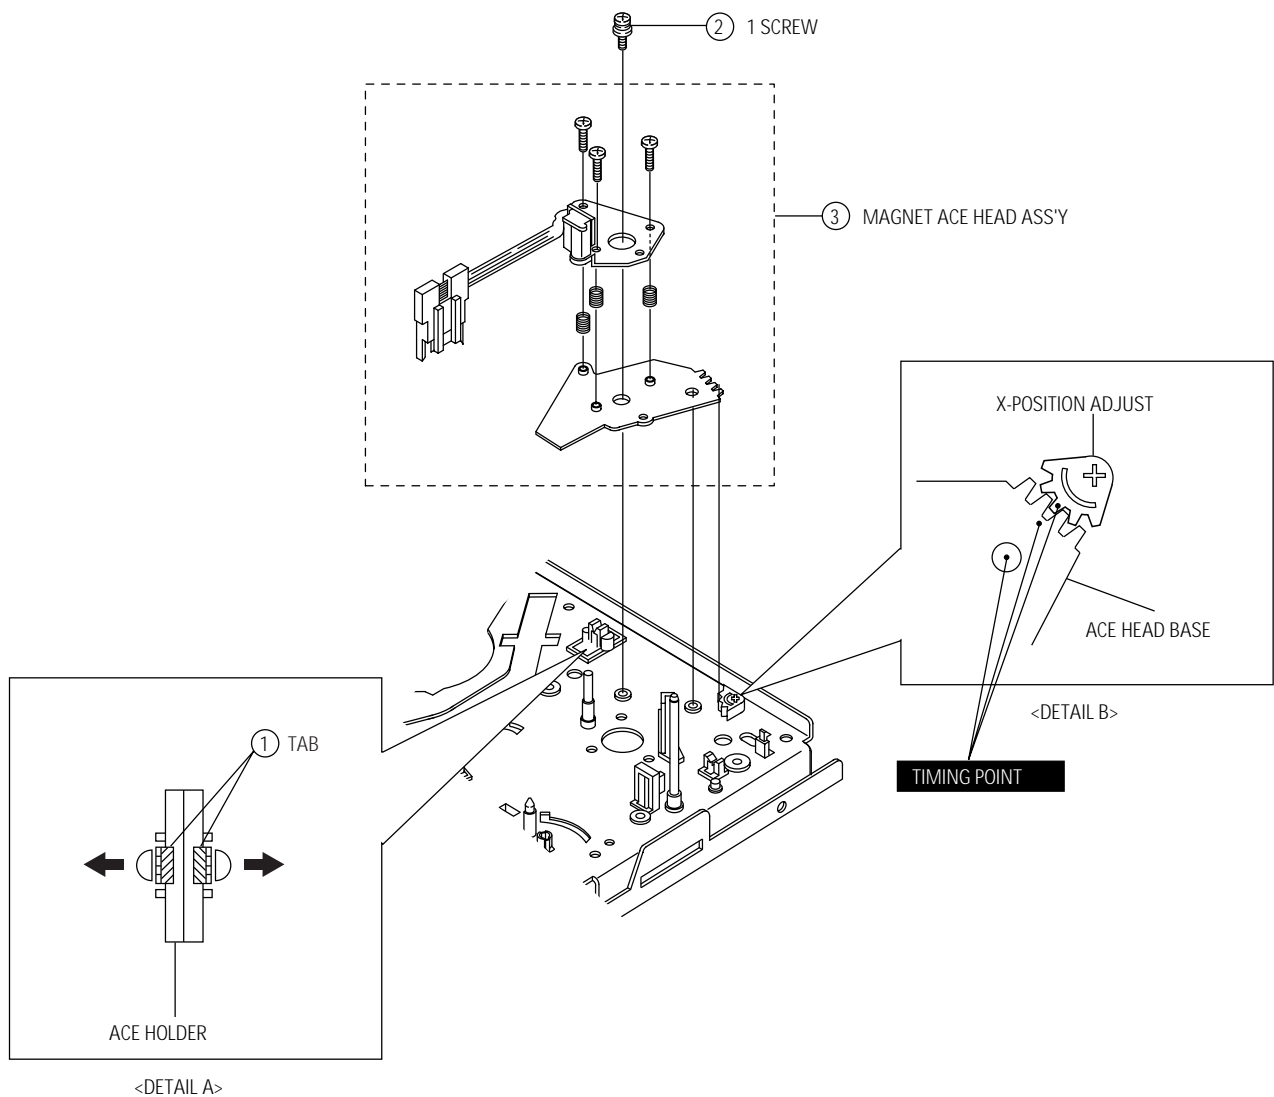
ACE Head Ass'y Removal and Reassembly
